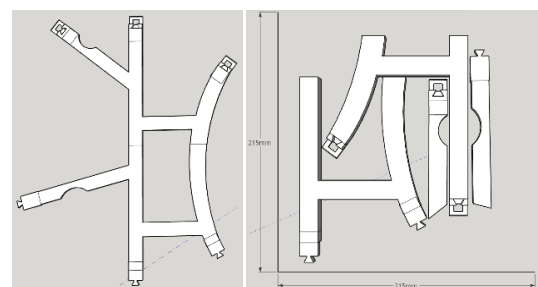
CAD of prototype. Left: intact. Right: split up to fit Ultimaker 3 maximum build dimensions
